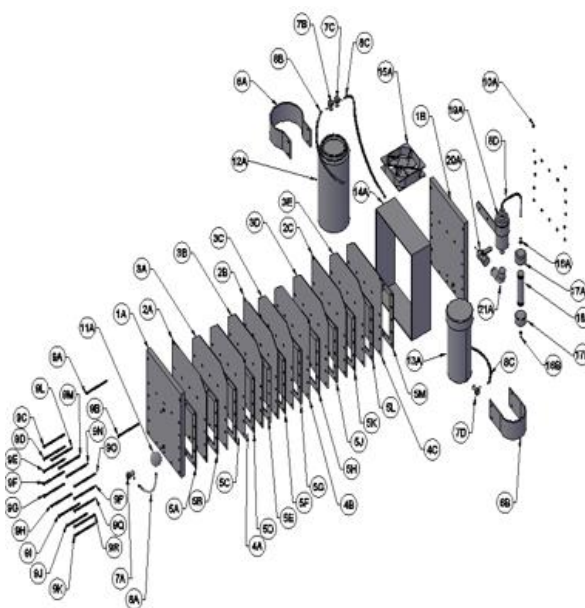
The exploded view of the Motorcycle Fuel Enhancer.
